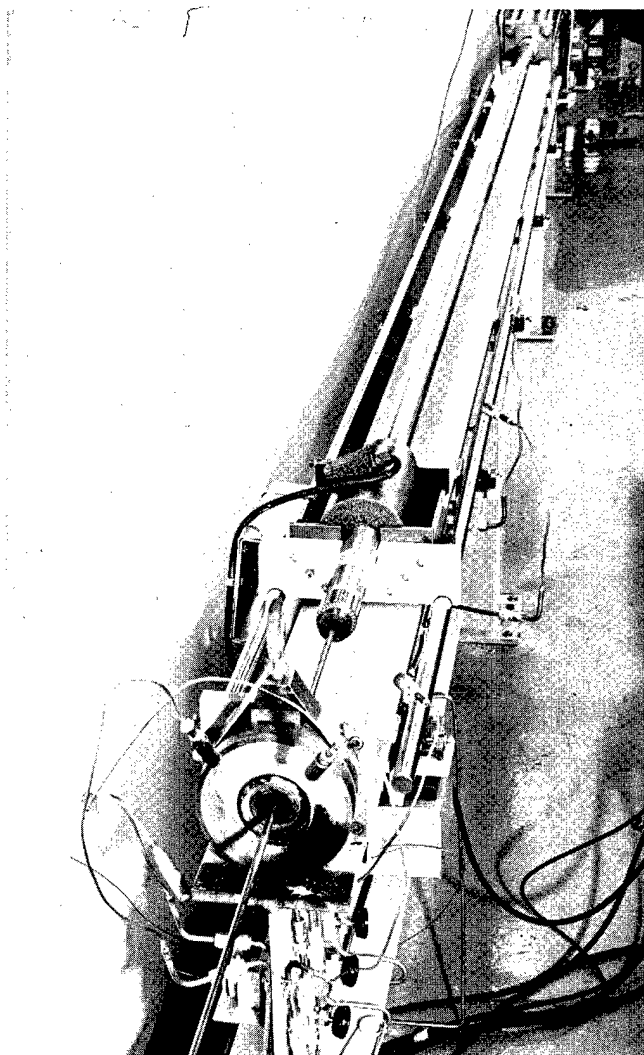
Draw bench for developing procedures in drawing tubing up to 5.0-cm diameter by 366-cm long, finished size. Actual draw stroke of the machine is 426 cm. Photo shows a work piece on a hardened mandrel passing through a die. The dark cylinder with an attached electric cable at the rear of the draw chuck is a tensile load cell attached to a recorder. Valves and burners for warming the workpiece and the hardened mandrel can be observed near the die holder. Commercial stroke alignment rails appear as 3.8-cm-diameter bars on each side of the draw length. (Neg. P67-10-94)
